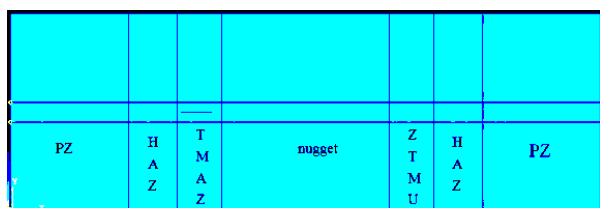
Zones in a FSW welded joint-3D model: NZ; TMAZ; HAZ; PZ, /7/.
